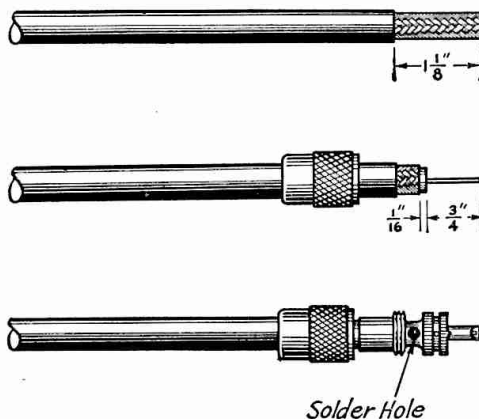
Dimensions for stripping 1/2-inch cable to fit Amphenol Type 83-1SP (PL-259) plug.
